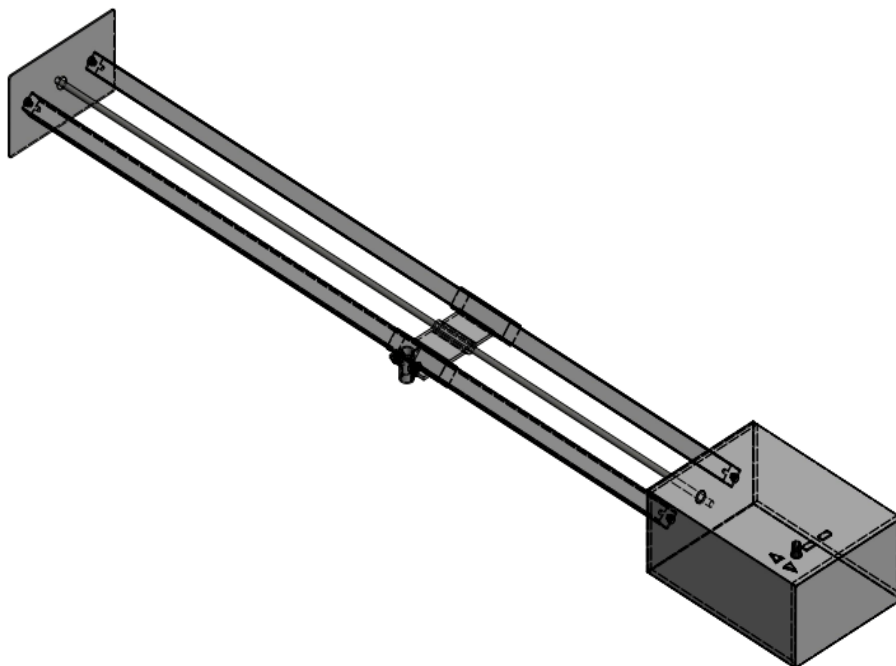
Design of 1 (one) axis plasma cutting torch rail mechanism [9]
